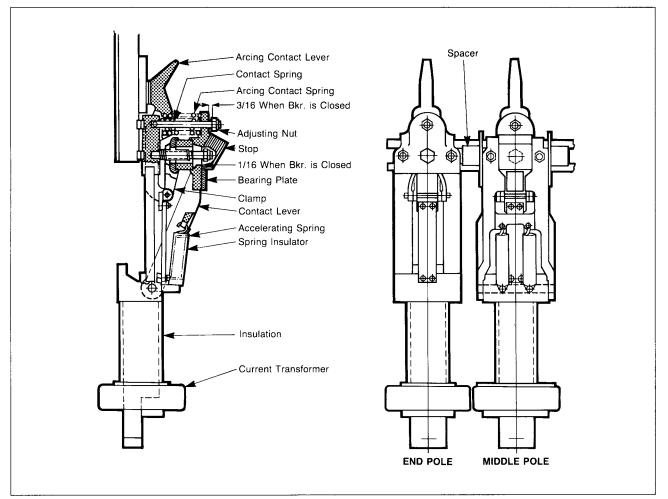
800-1875 Ampere Moving and Stationary Contact Assembly
